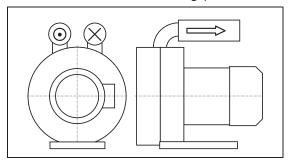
2BH1840-7J... (two-impeller pump-motor unit with double-flow design)
